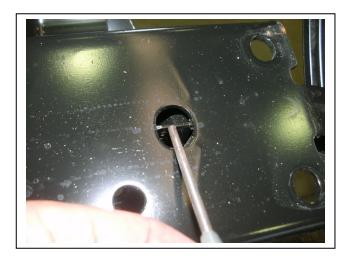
Hammer internal plate to outside of hole for insertion of bolt
